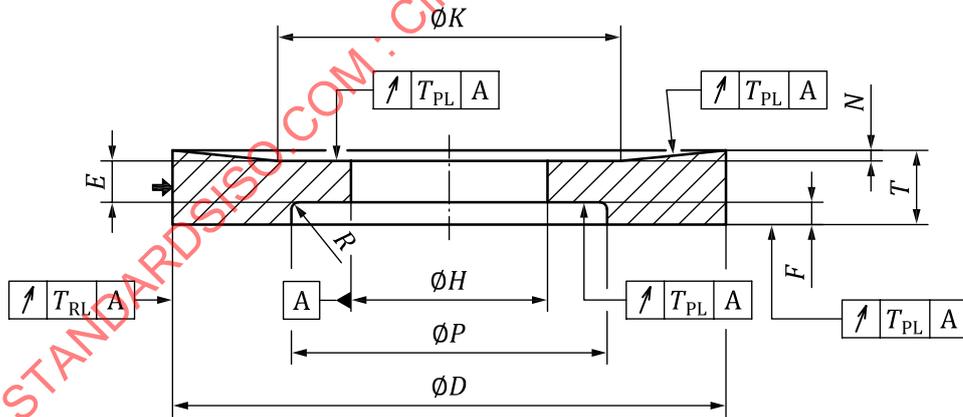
Grinding wheel, relieved on one side, recessed on the other side (Type 22)
